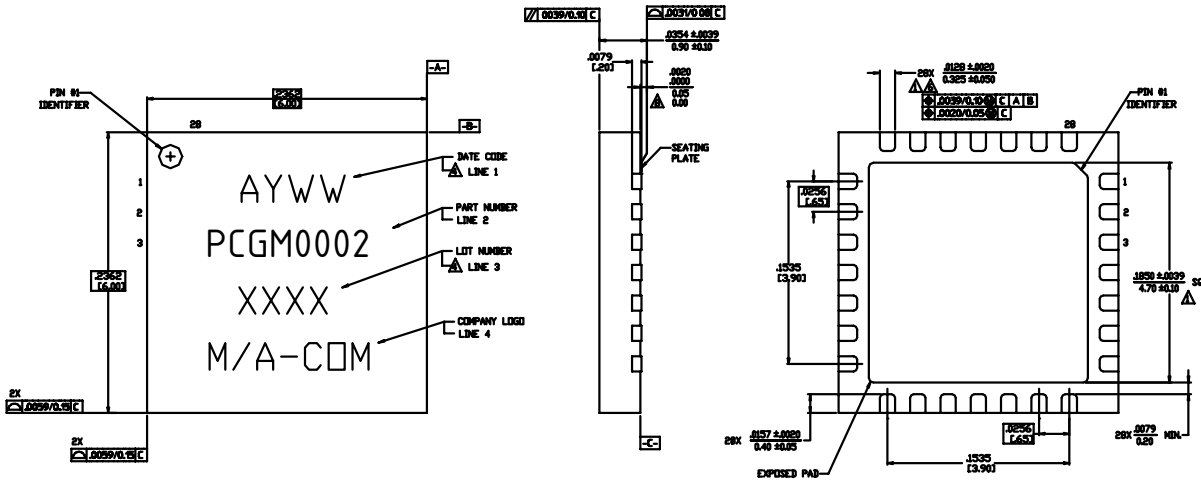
6mm FQFP-N 28 Lead Package Drawing
